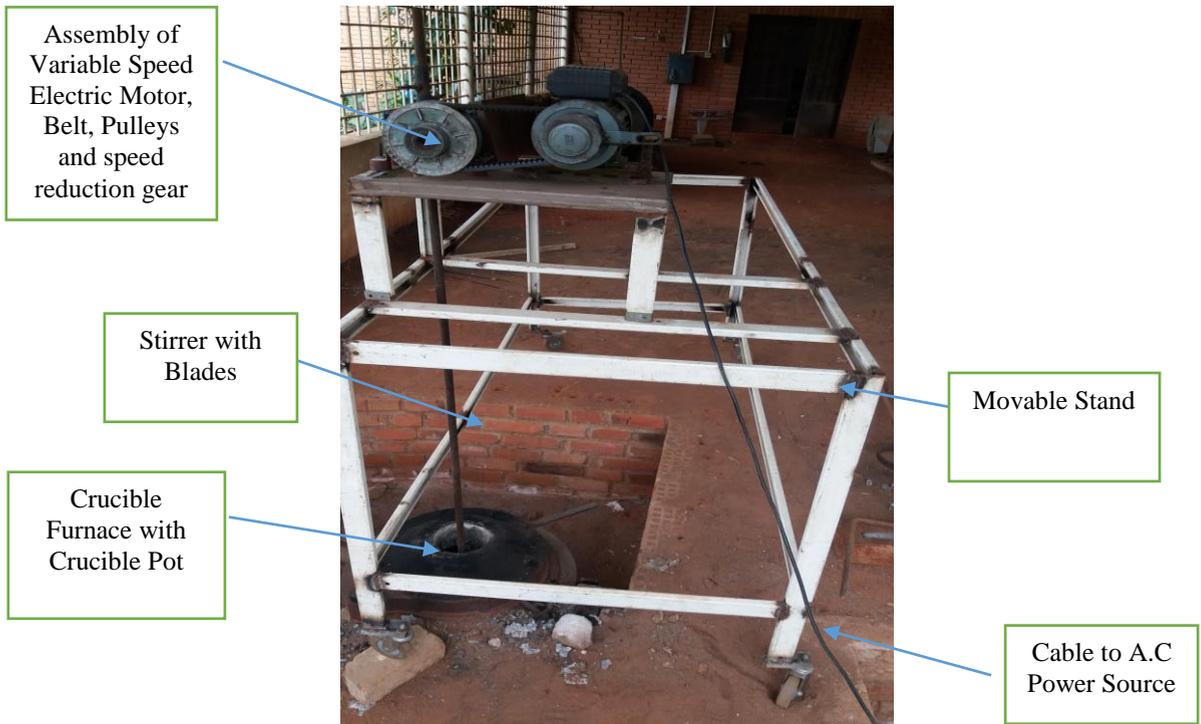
Fabricated and Improvised Stirrer Set up for Stir Casting
